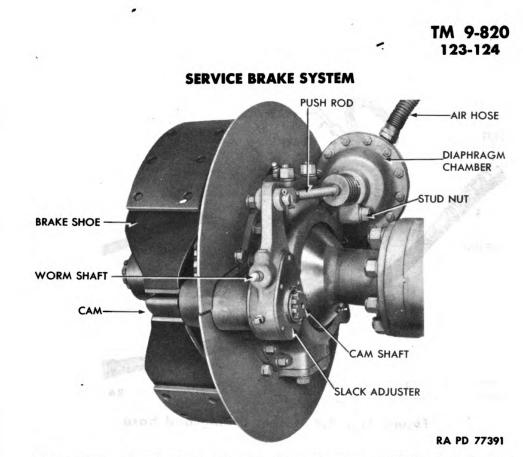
Front Brake Diaphragm Chamber and Slack Adjuster
